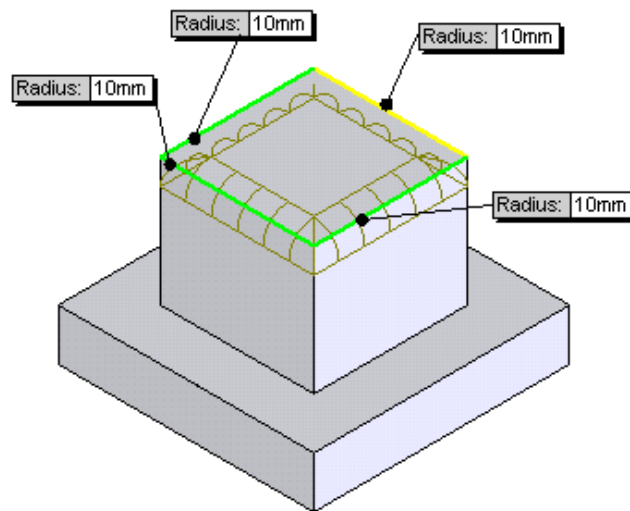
Preview of the fillet feature with Multiple radius fillet check box selected
